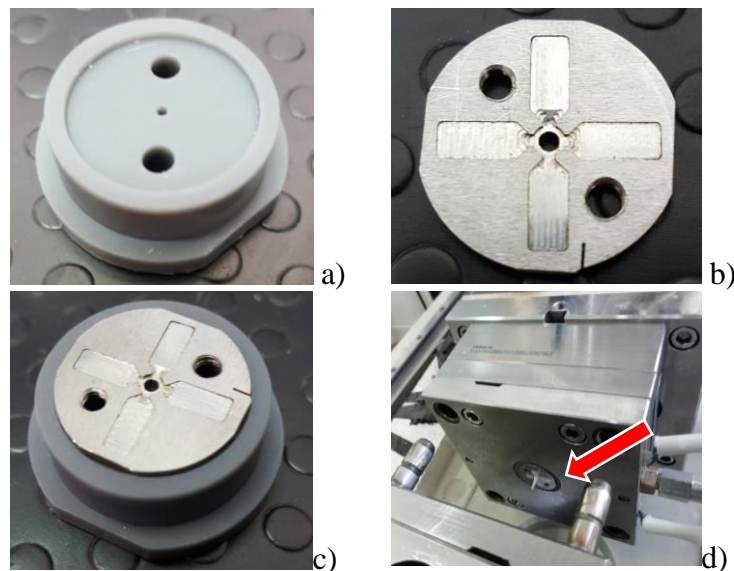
a) Resin support, b) milled tool, c) assembled removable mold, and d) entire mold with main plate mounted on machine (with injected part before ejection)
